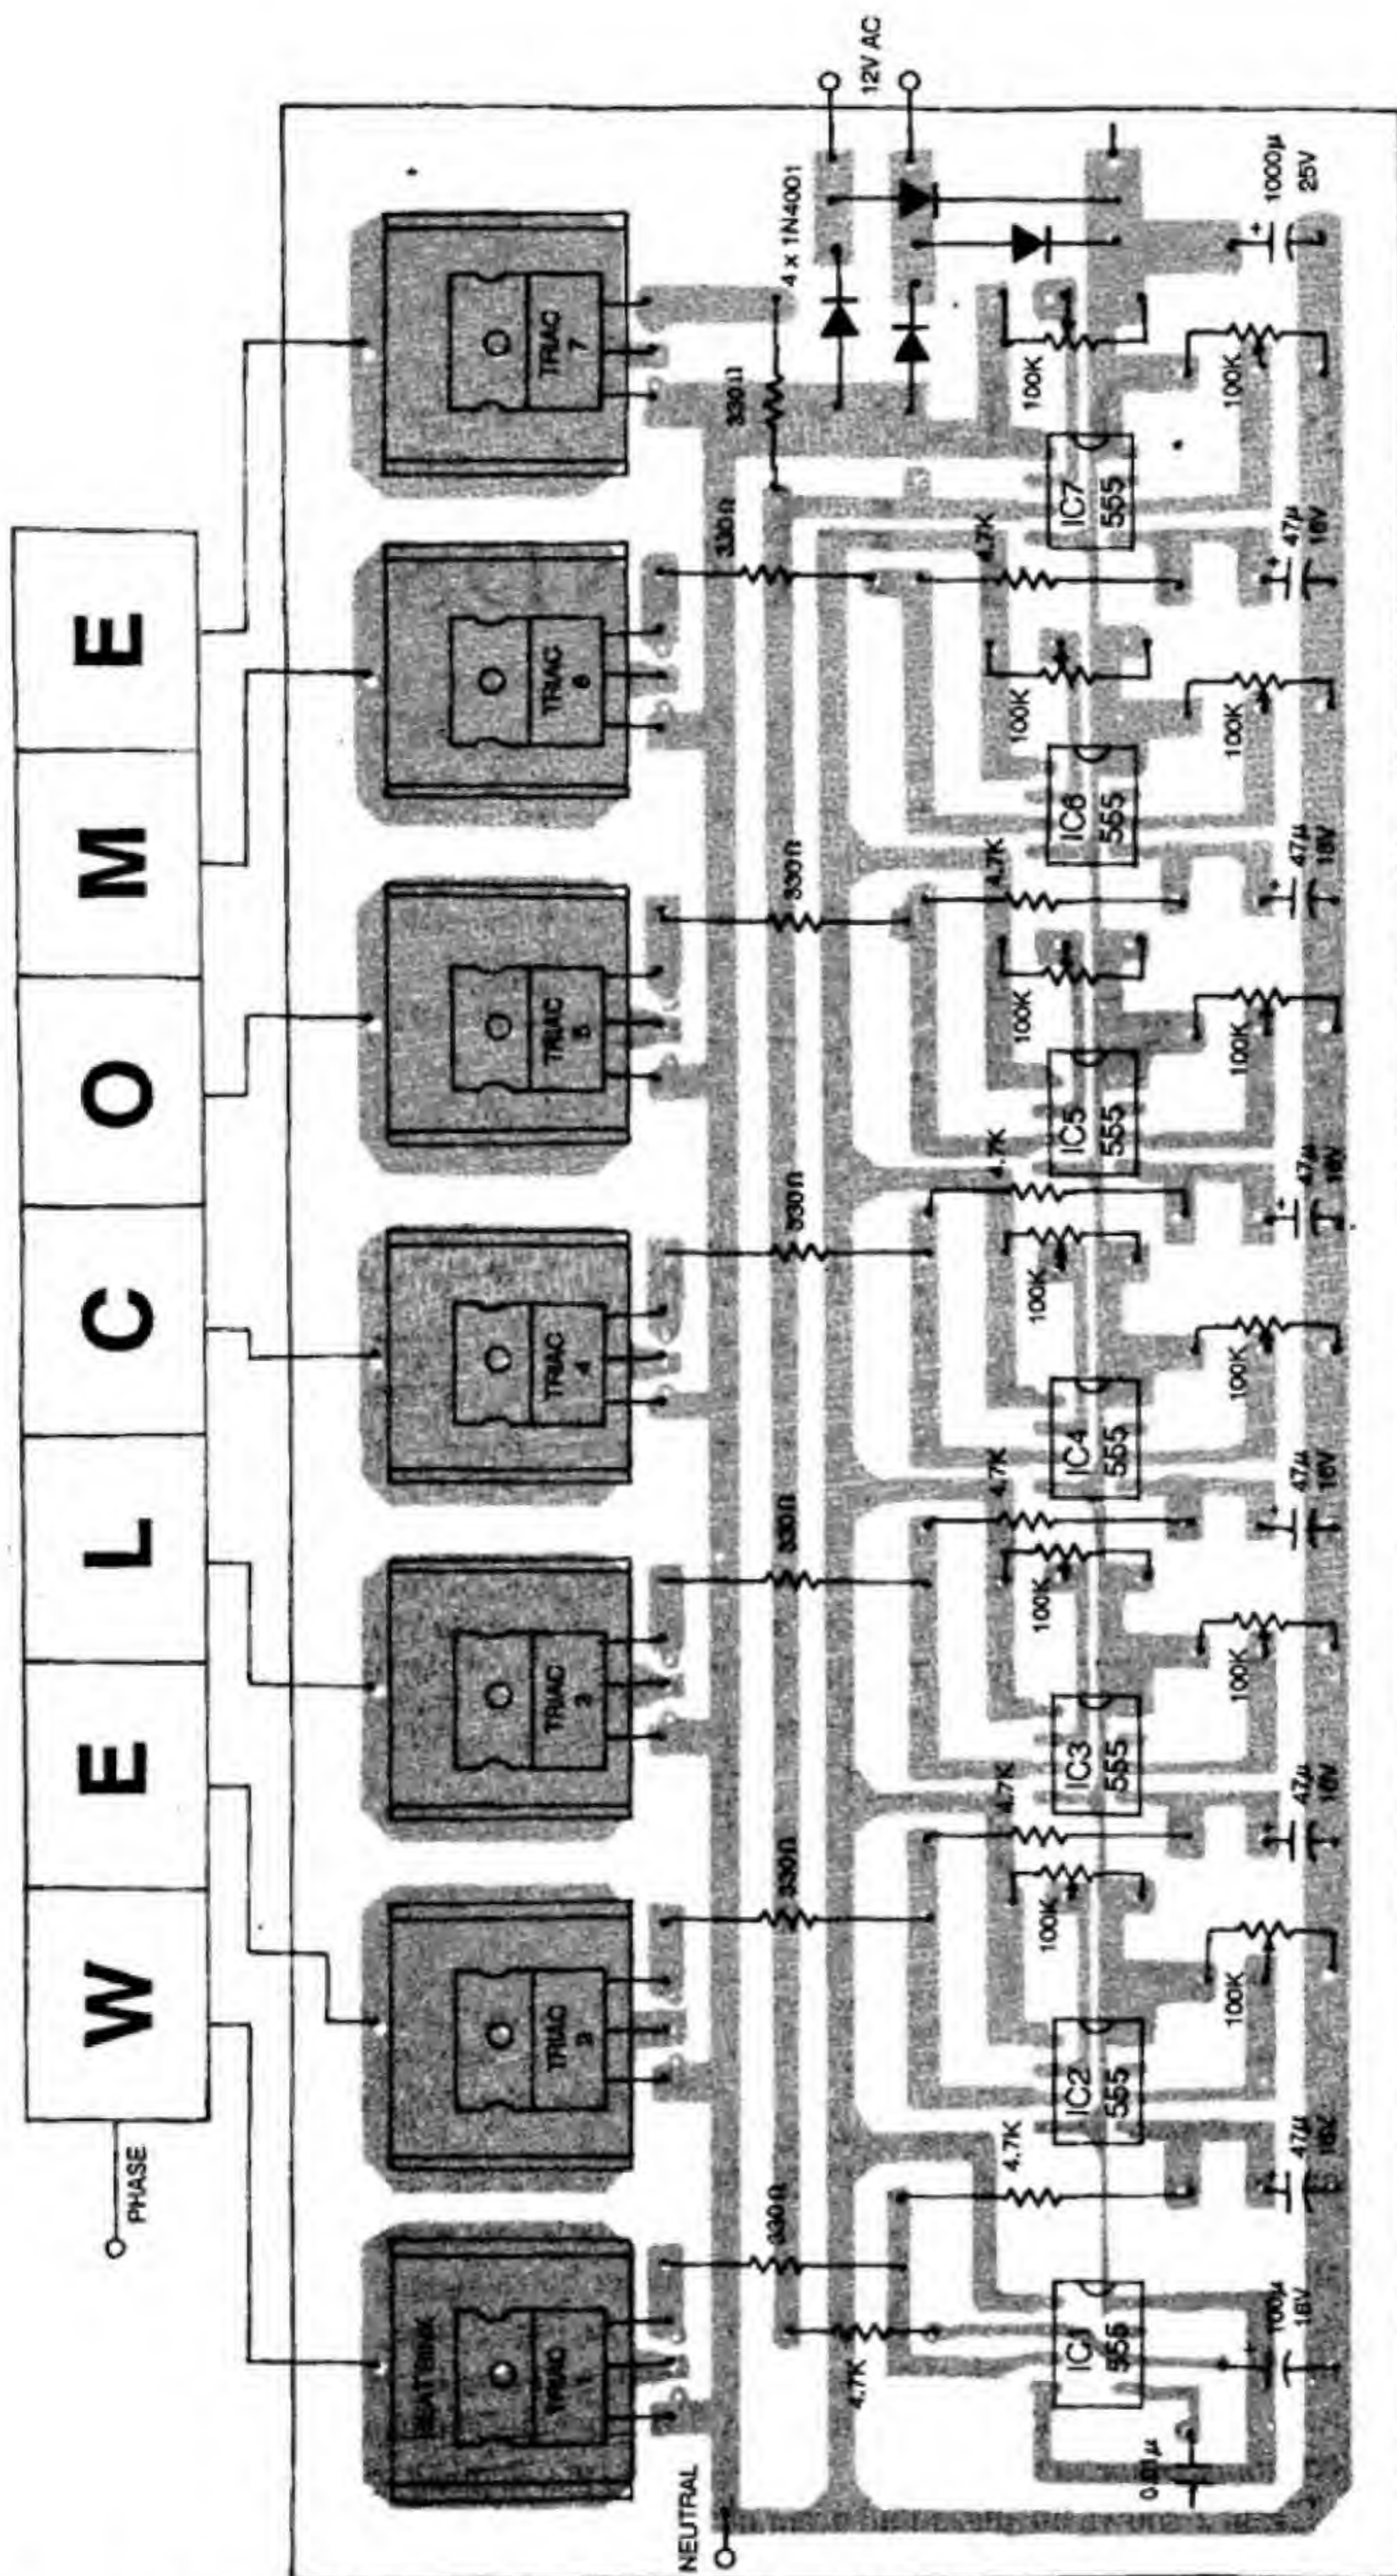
Components layout for the PCB shown in Fig. 2 .
